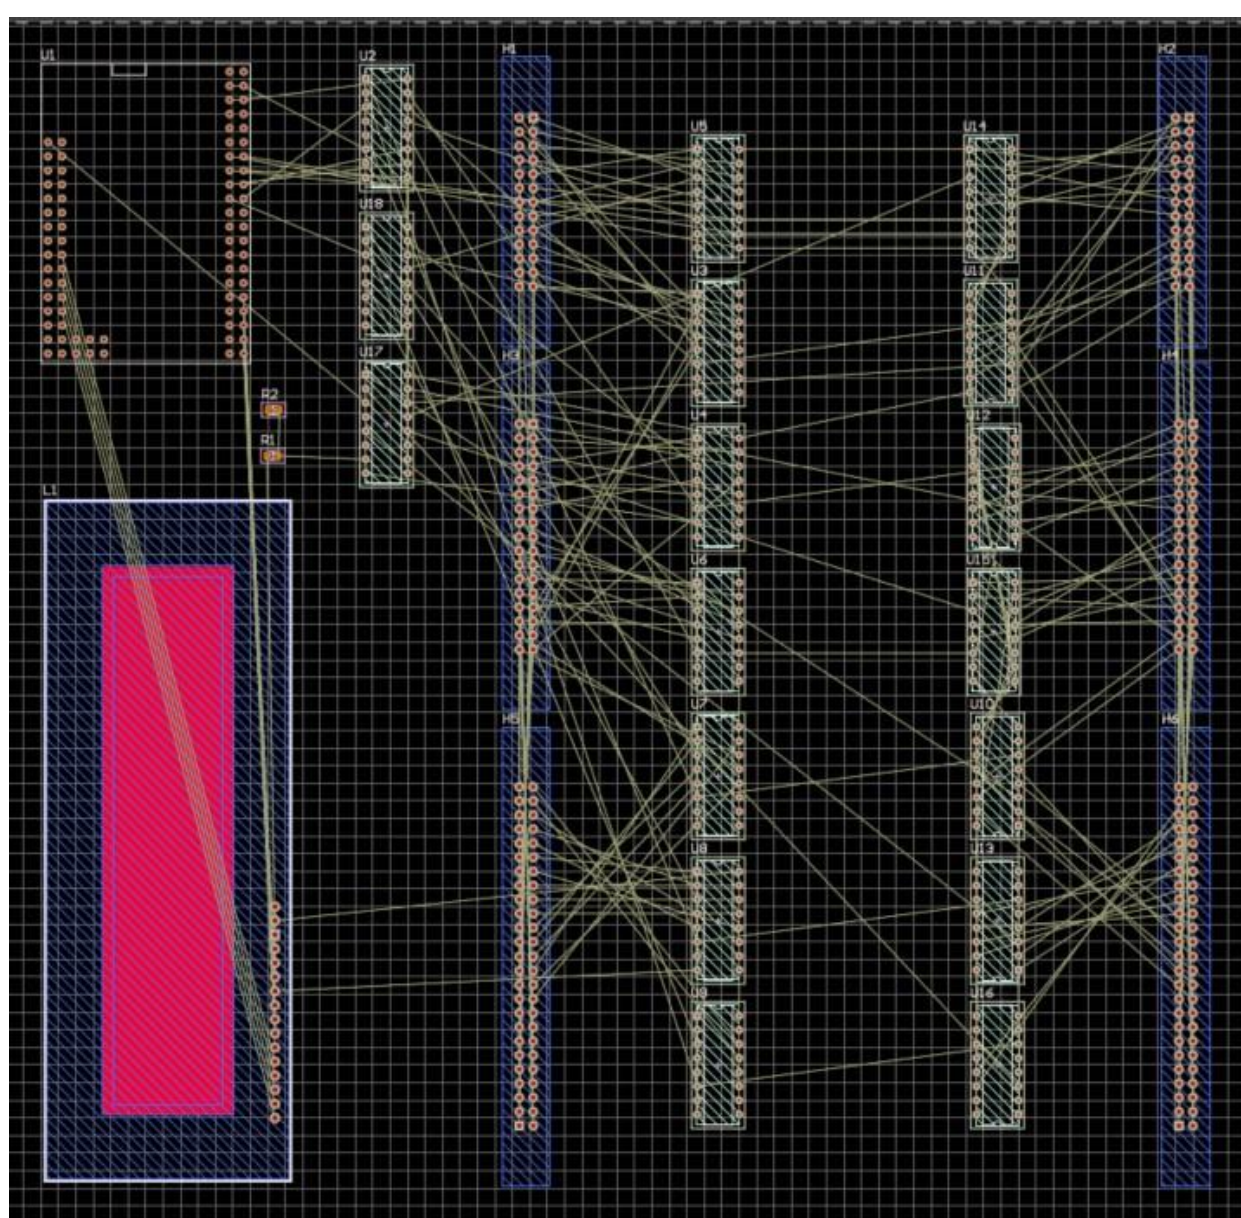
Prototype PCB design capable of testing 26, 34, & 50 pin cables which is currently under evaluation for production.
